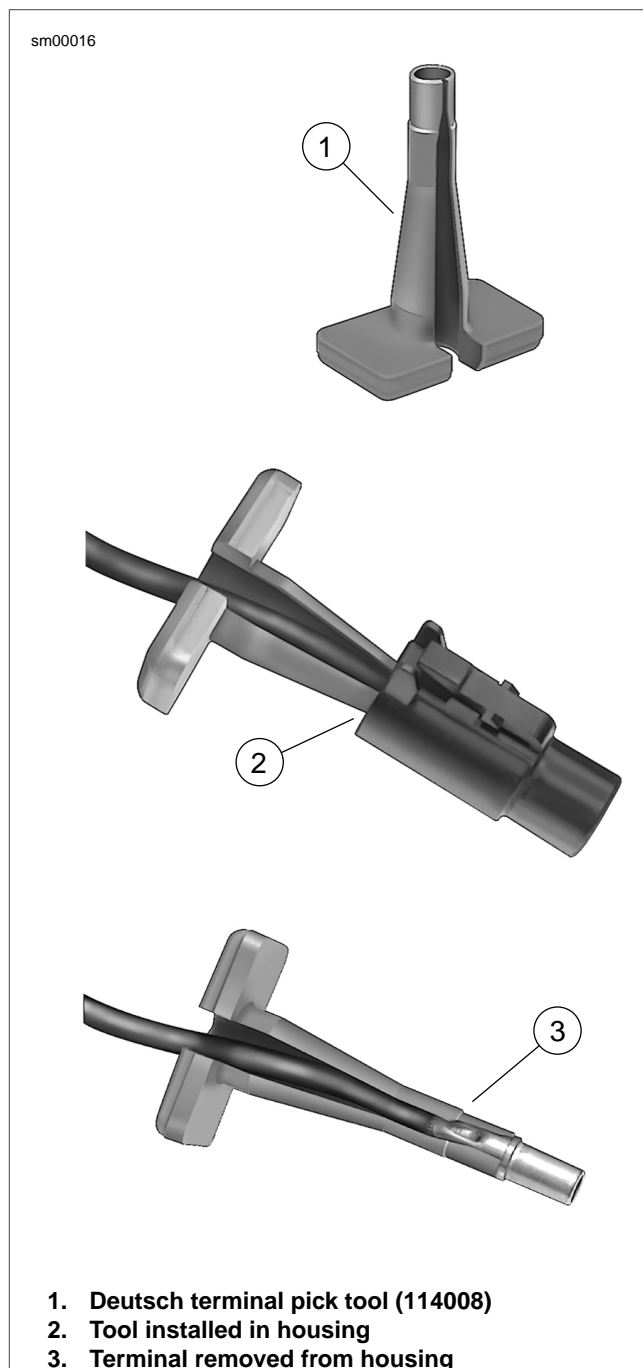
Deutsch 1-Place Connector: Remove Socket/Pin Housing
